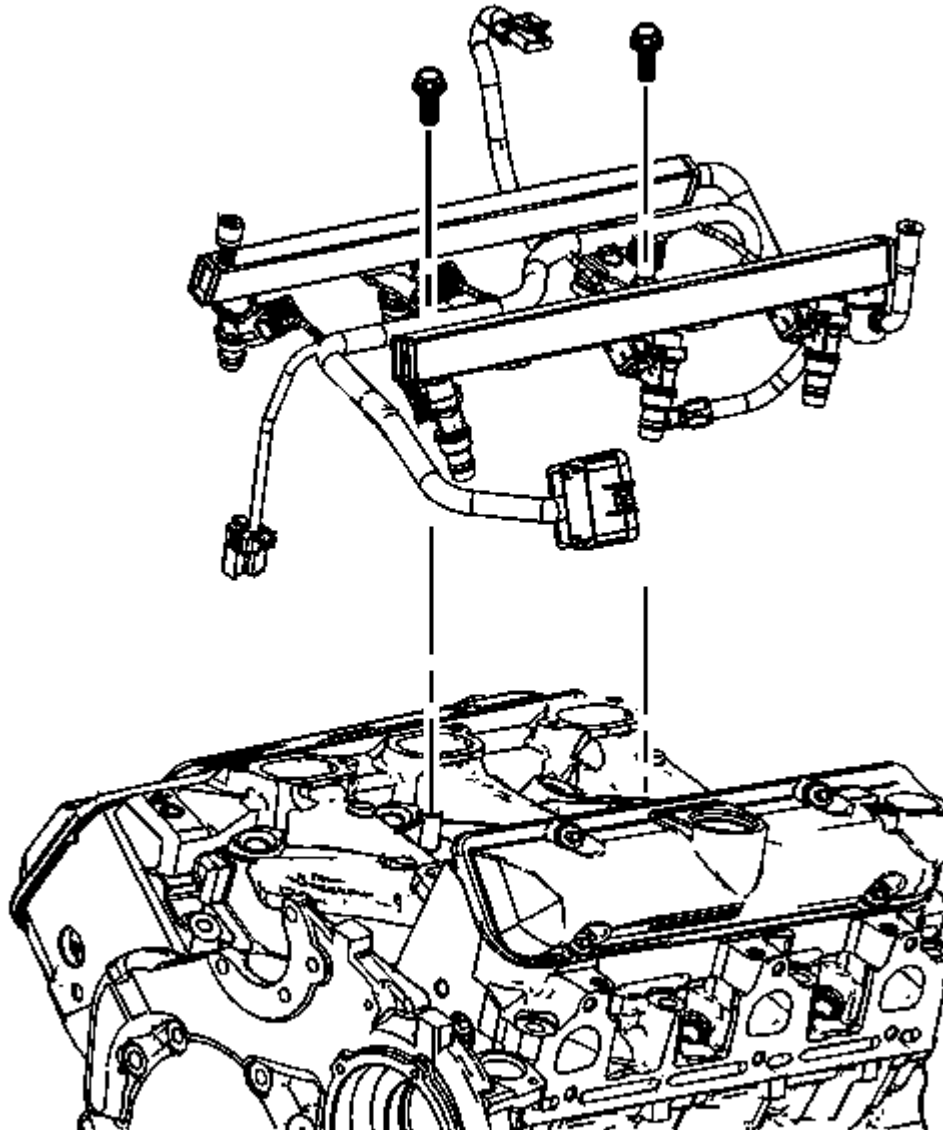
View Of Fuel Injector And Manifold Air Pressure (MAP) Wiring Harness
